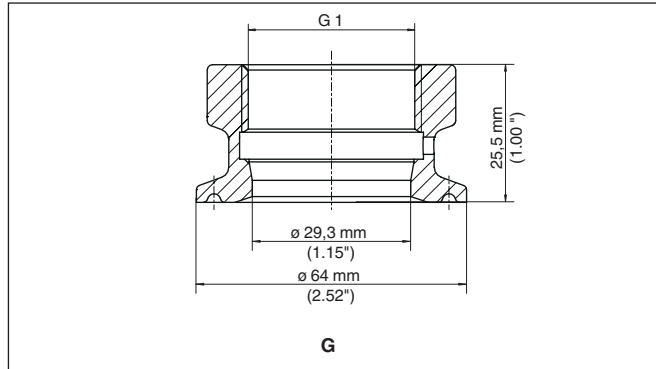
Dimensions of threaded adapter G1 (DIN 3852-X) on Clamp 2" (DIN 32676, ISO 2852) PN 16
